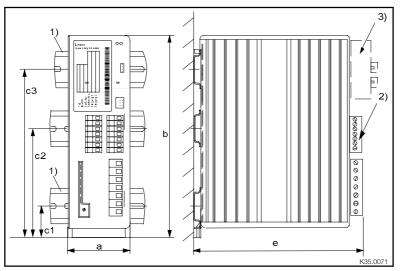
Dimensions 8211 - 8214: DIN-rail assembly
